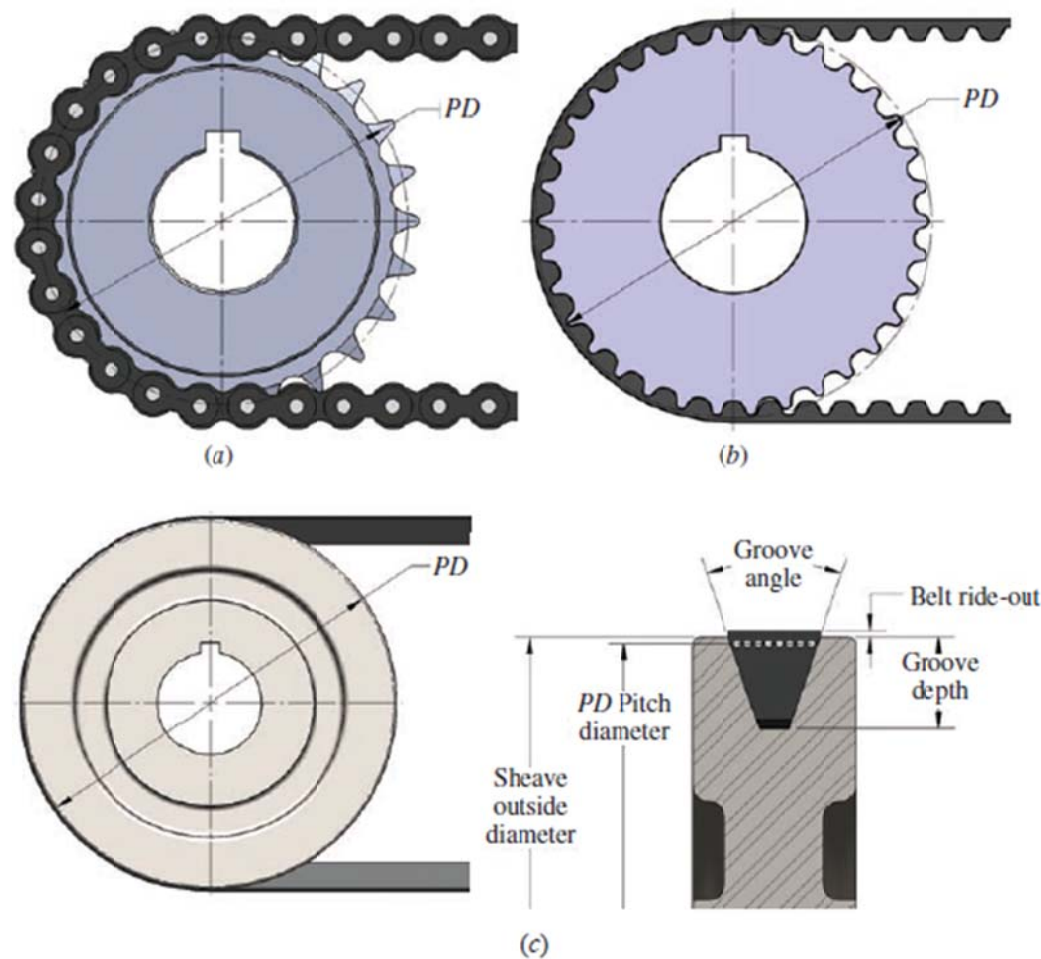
Pitch diameter on a (a) chain sprocket, (b) synchronous belt sprocket, and (c) V-belt sheave with section view
